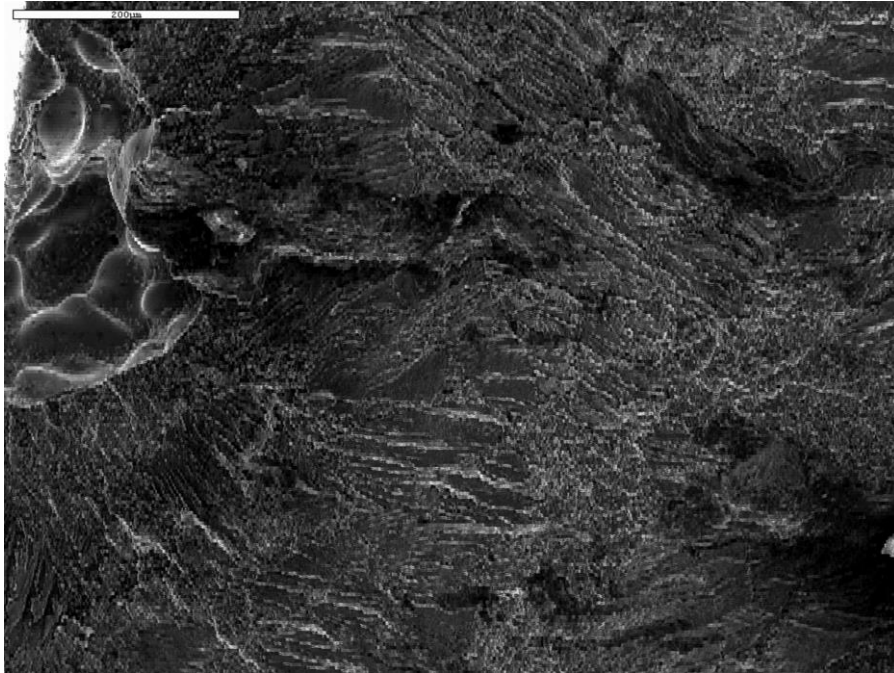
Close-up look at the fatigue initiating pore right below the specimen surface in rotating bending fatigue specimen.
